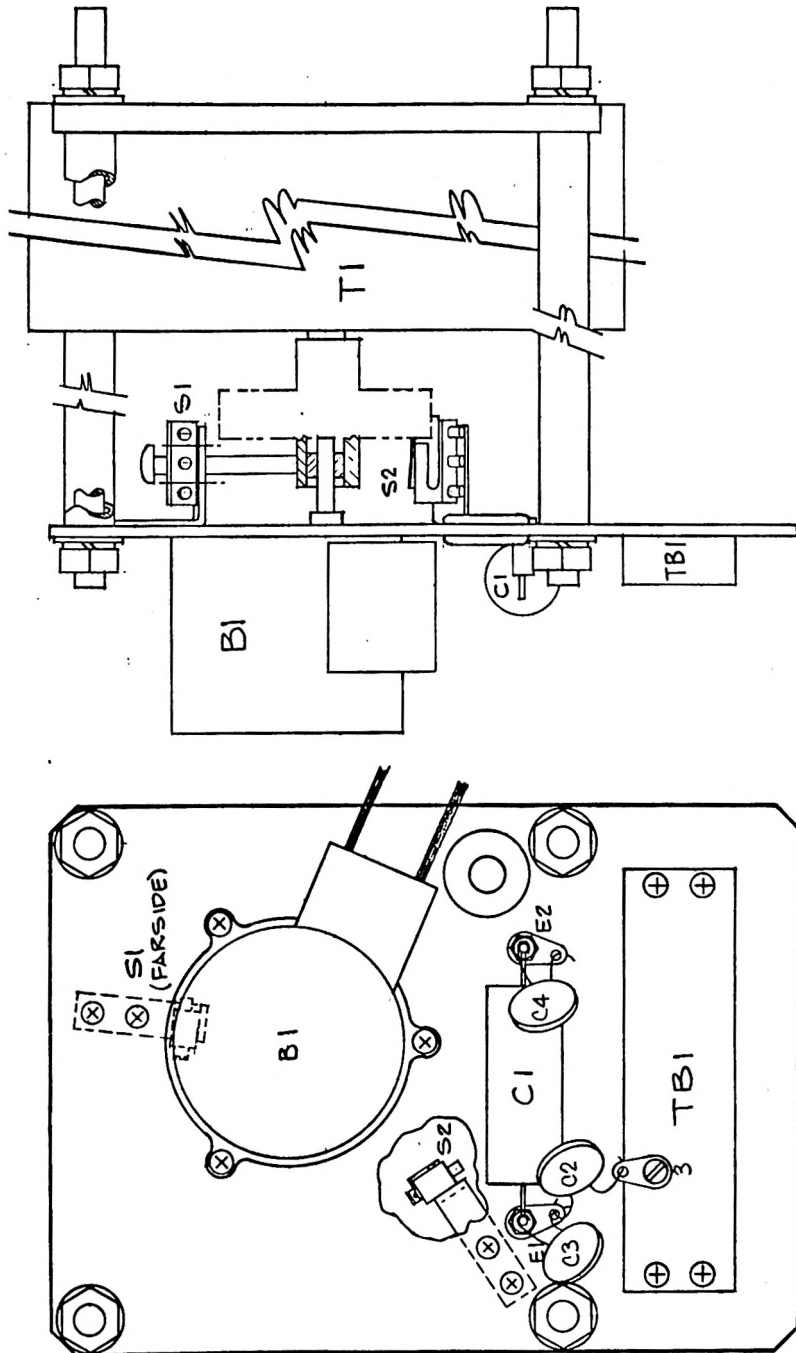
Variable Transformer Drive Assembly, A19A2.
